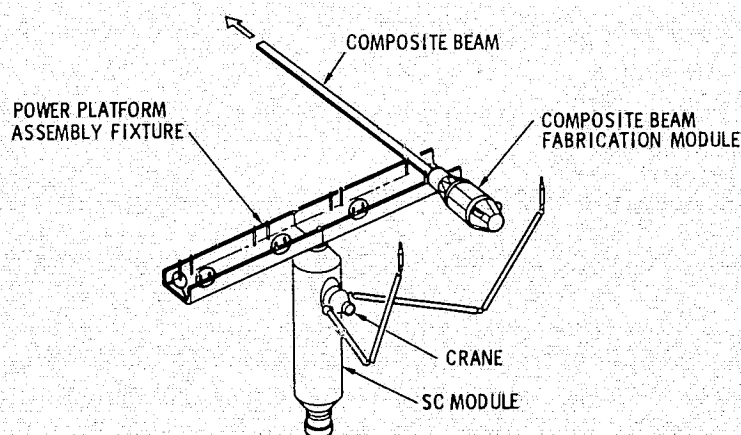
Fabrication and Assembly Equipment for the Power Platform
